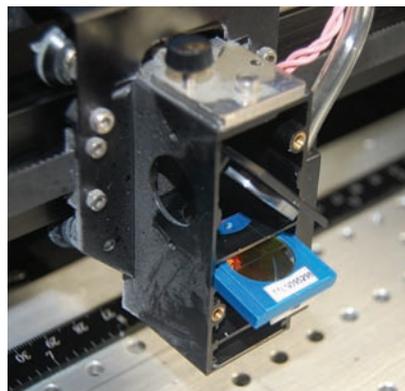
The lens and upper mirror can be easily removed for cleaning.
